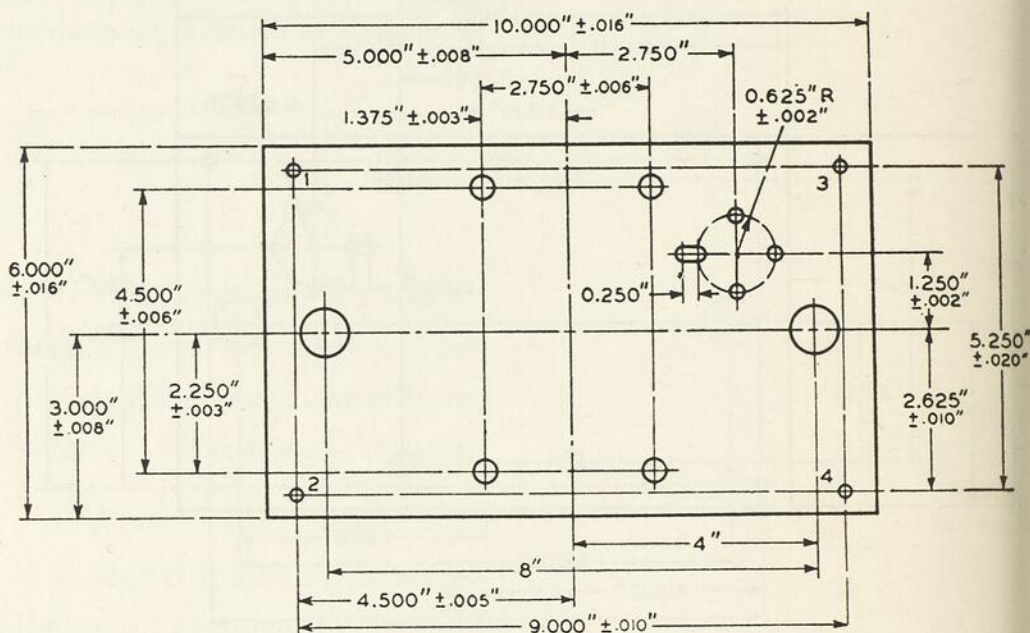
Flat plate of Fig. 5 with the addition of tolerances
